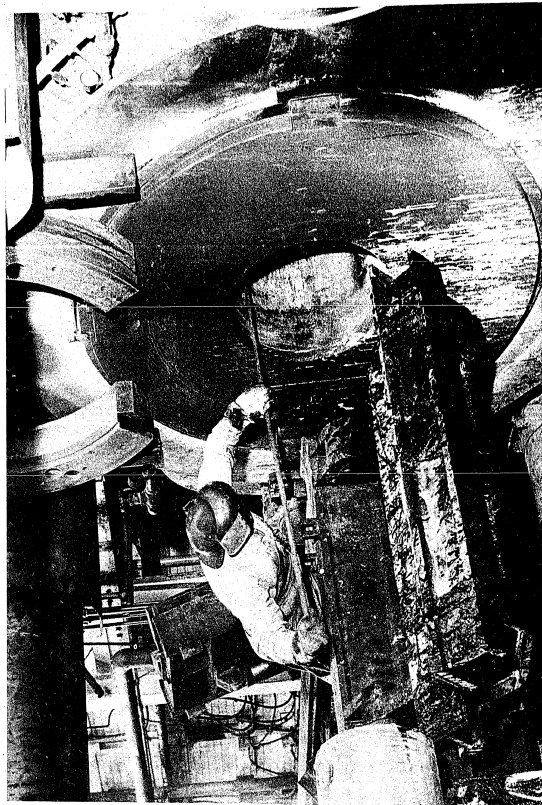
(C) - CLOSE UP VIEW OF THE CONTAINER AND DIE BEING LUBRICATED.
